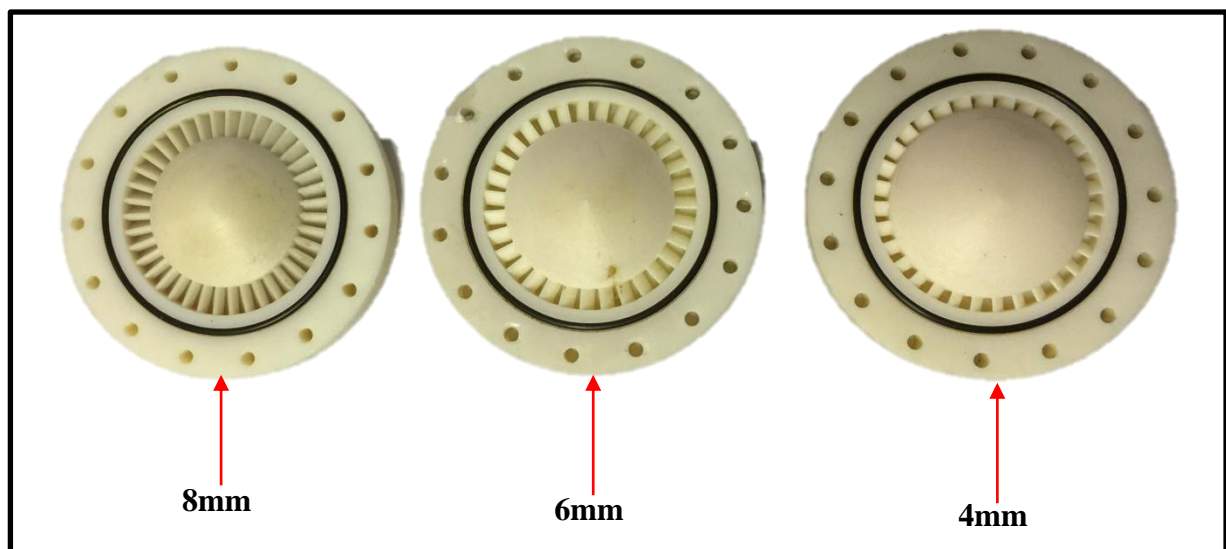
Pictures of manufactured stators with blades heights (4mm, 6mm, and 8mm)
